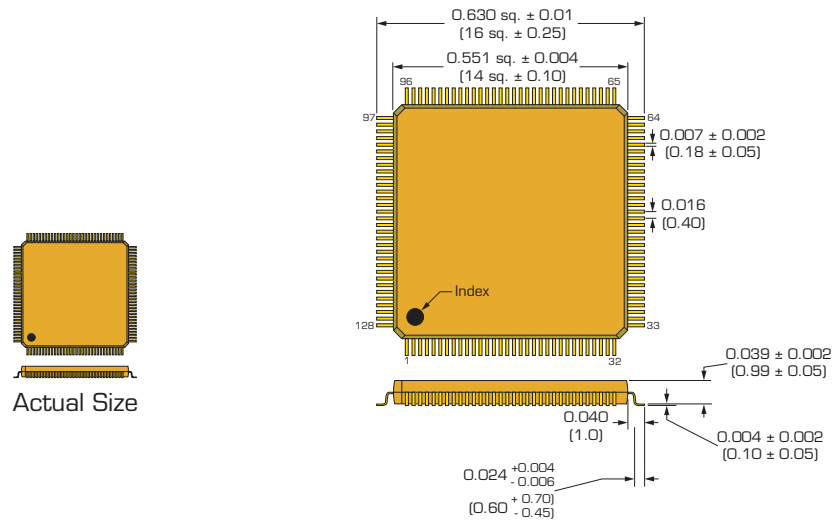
M3000S TQFP-128 Dimensions, Quad Package Top View
